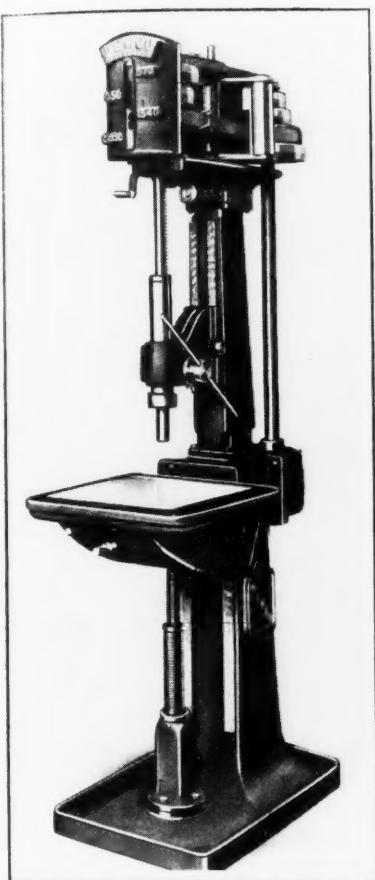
"Demco" Motor-driven Model K Drilling Machine
